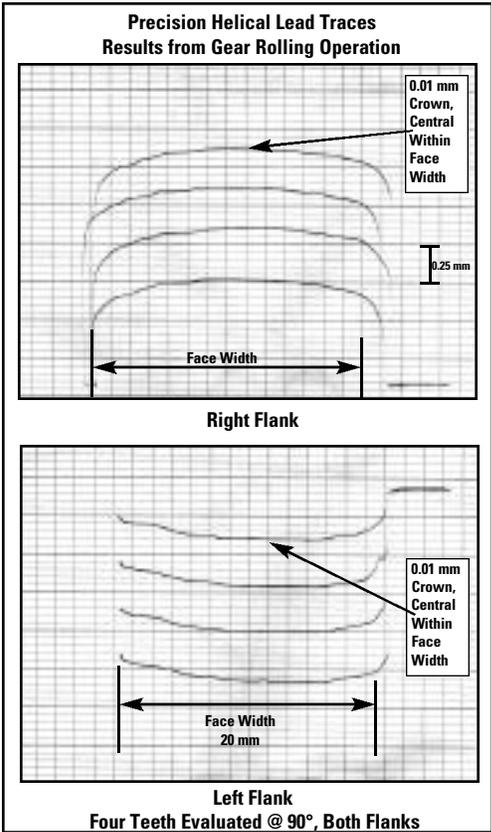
Gear tooth lead error traces on rolled densified helical gears taken at 90° intervals on the gears.
